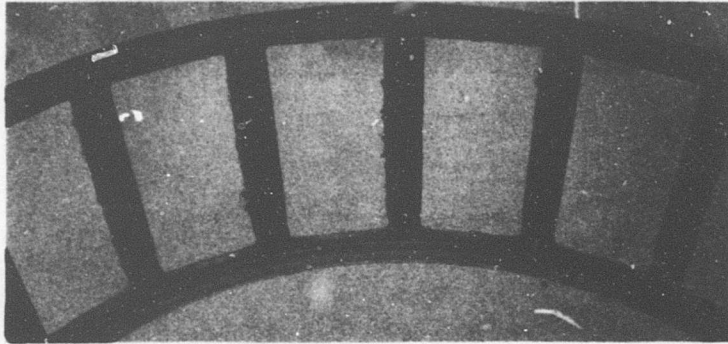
HM926700-Series Bearing After Test, Bearing No. 73-5, Test No. 29--Damaged at 10,000 rpm.
